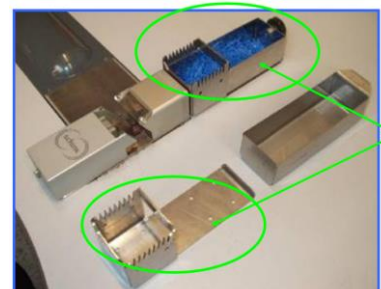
Strippers and equipment at the time of welding[4]
